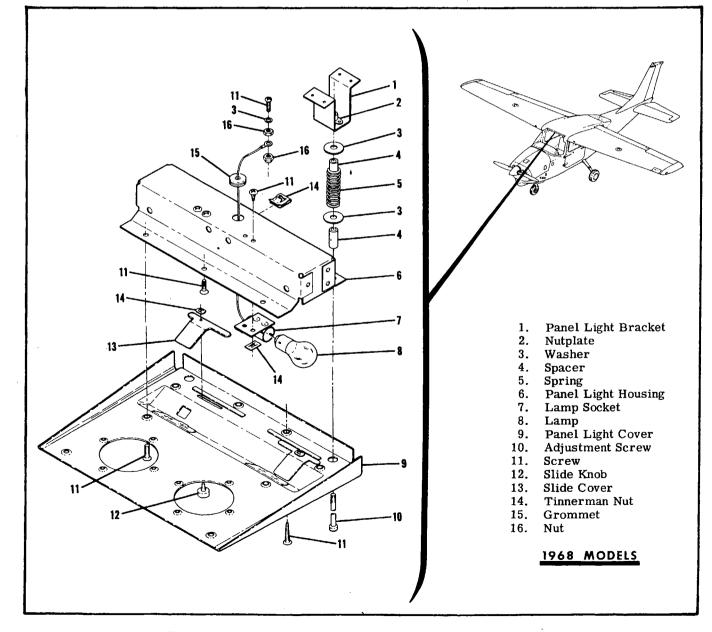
Overhead Light Console Installation (Sheet 2 of 2)
